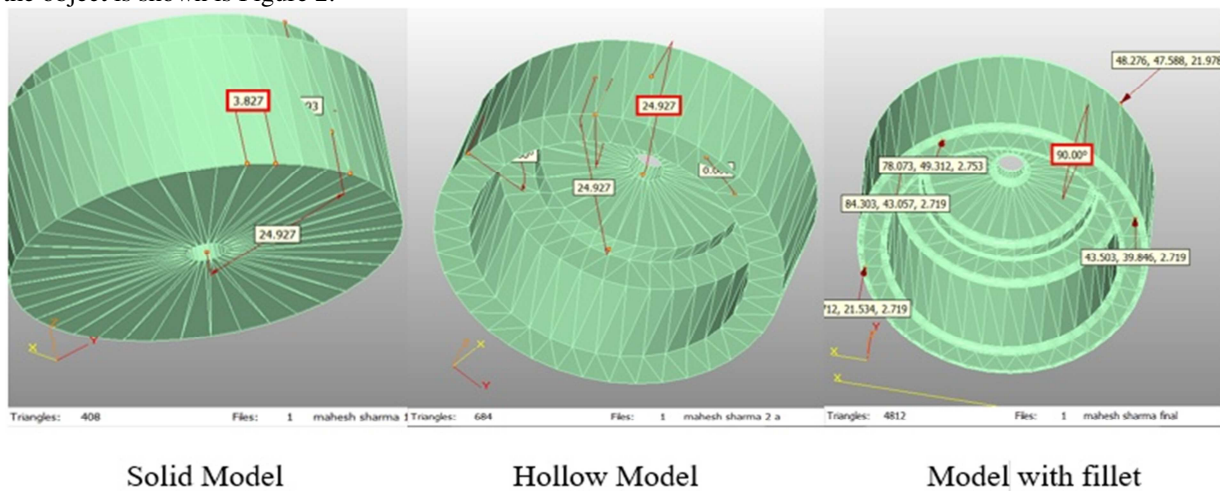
STL model in three form solid, hollow and fillet (Using 3D Tool).
